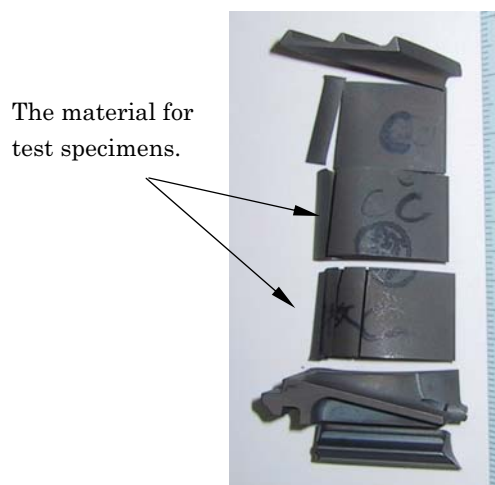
Gas Turbine Blade and Machining Positions of Test Specimens.
